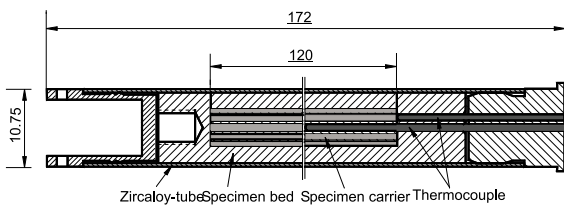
Sketch showing the layout of specimen rods 1, 4 and 10.
